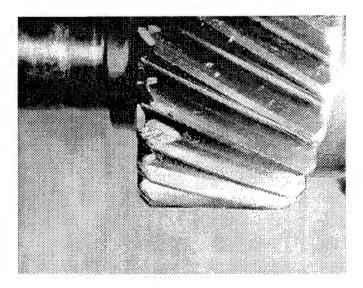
Damage to starboard helical input pinion gear. Gouge or chip is localized to a single tooth near the edge of the mesh.
